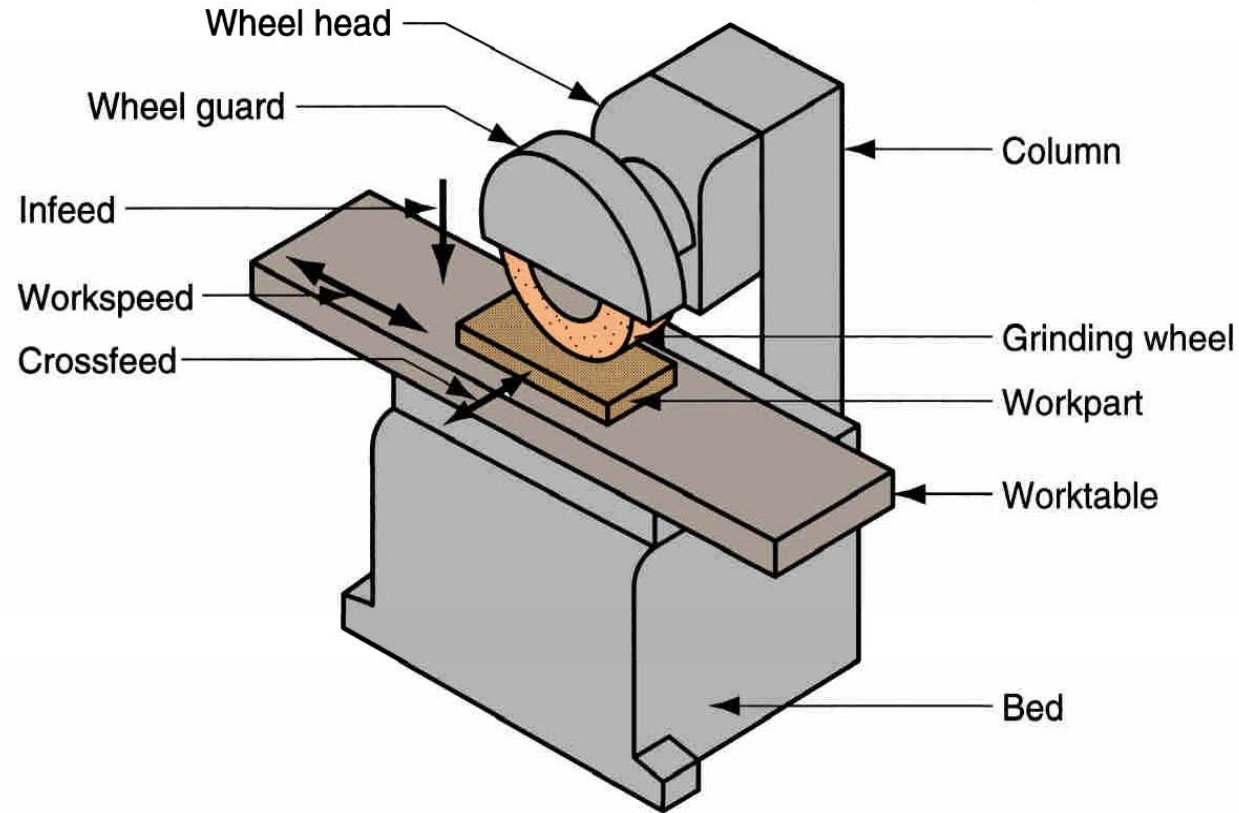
Surface grinder with horizontal spindle and reciprocating worktable (most common grinder type)
